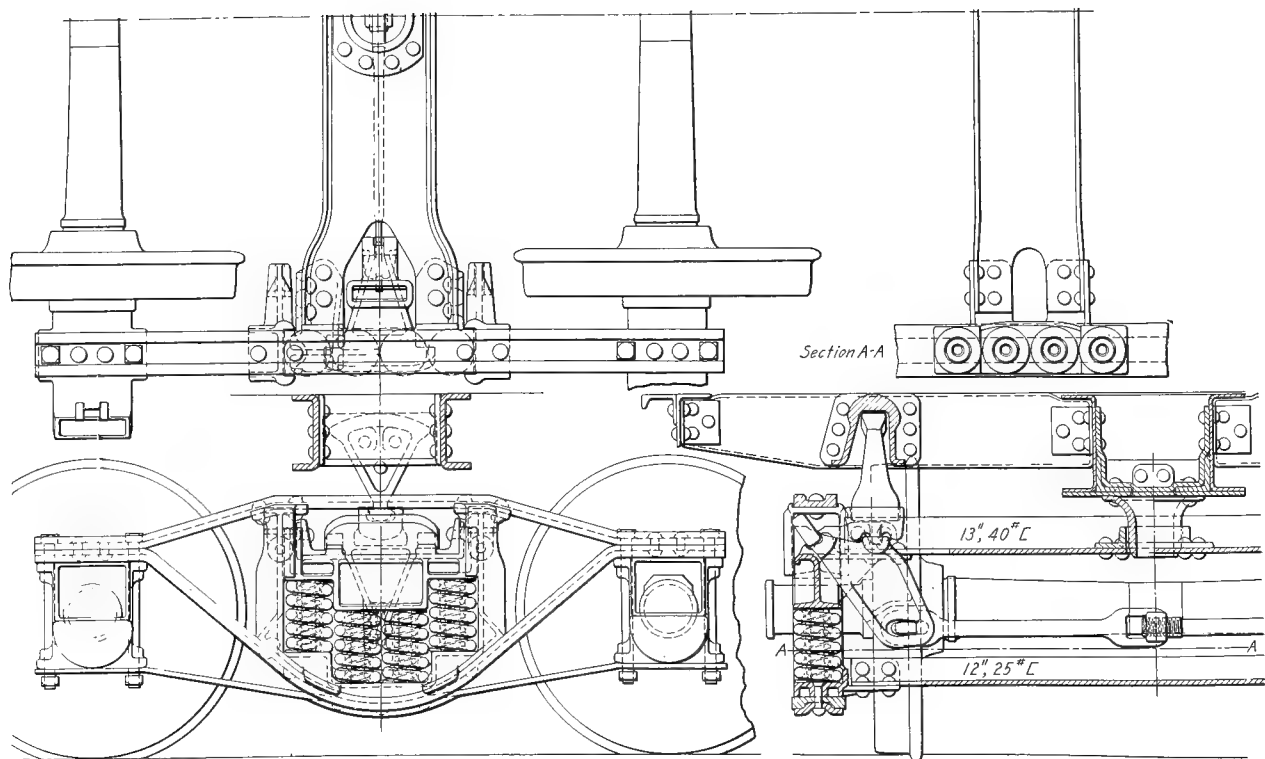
Summers Balanced Side-Bearing Truck. Summers Steel Car Company.
